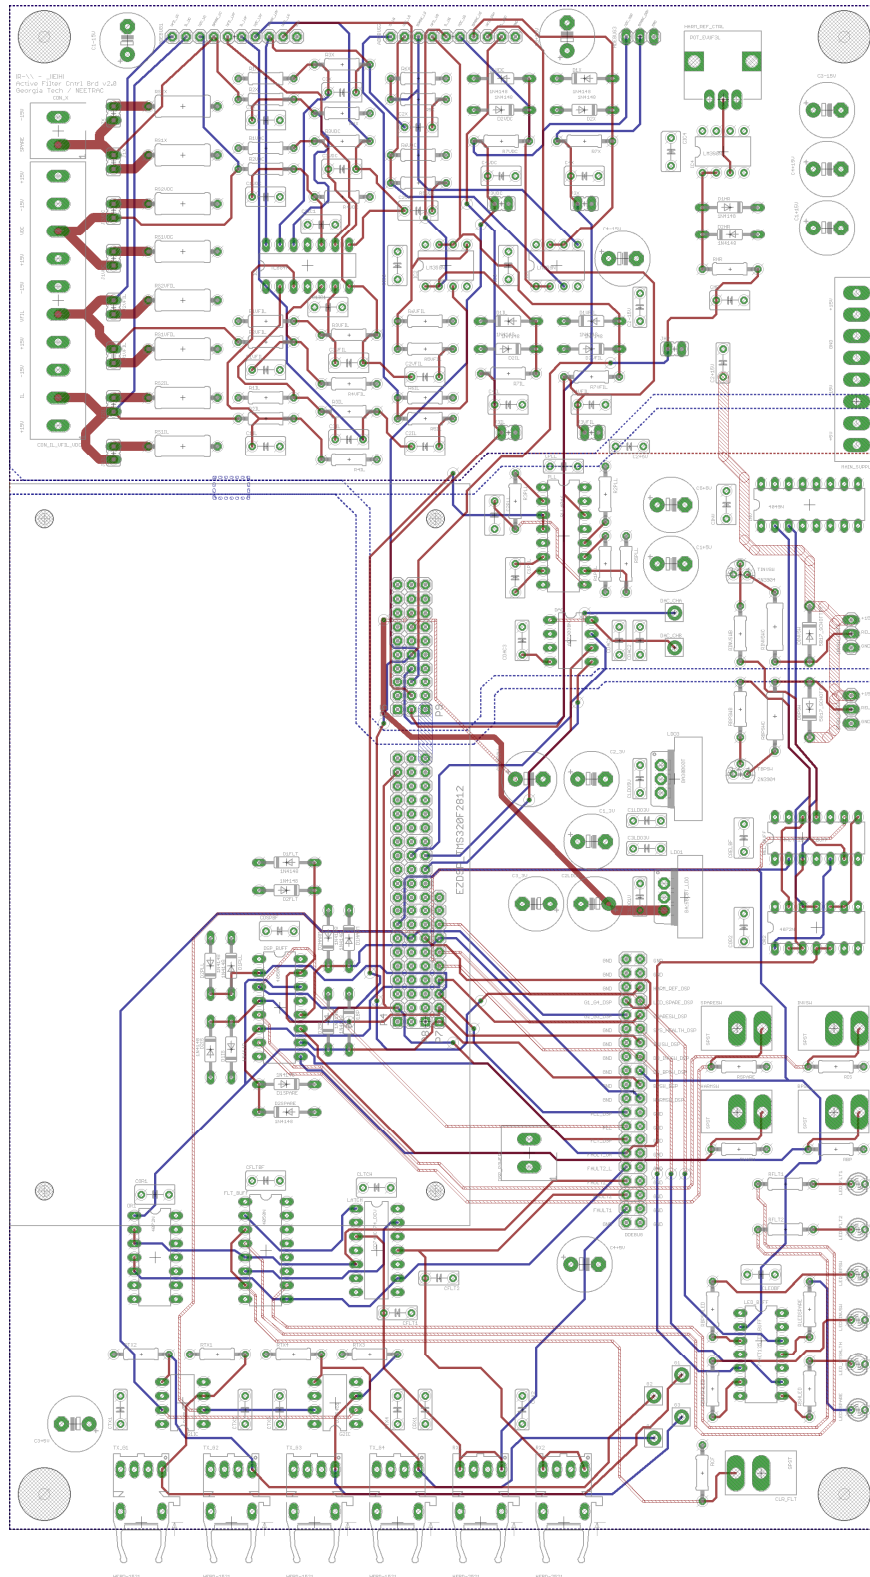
Printed circuit board (PCB) layout of the third harmonic hybrid active filter controller board.
